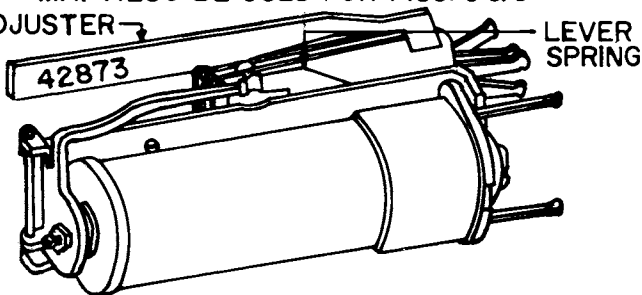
ADJUSTING LEVER SPRINGS FOR TENSION
